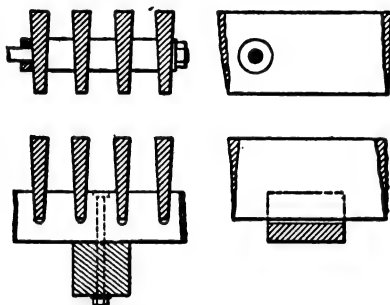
METHOD OF HOLDING GRIZZLY BARS.
